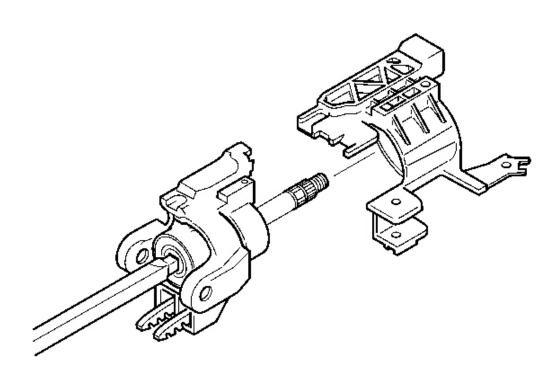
View Of Turn Signal Switch Housing & Steering Column Shaft Assembly Courtesy of GENERAL MOTORS CORP.
